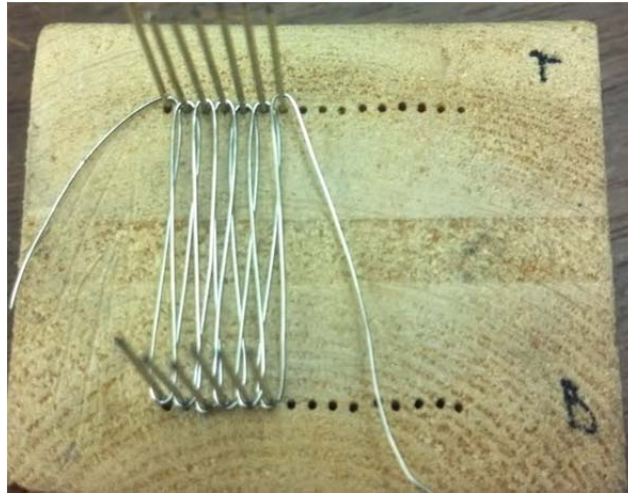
Heat wire jig used to bend the heating element into shape with a partially complete heating element.
